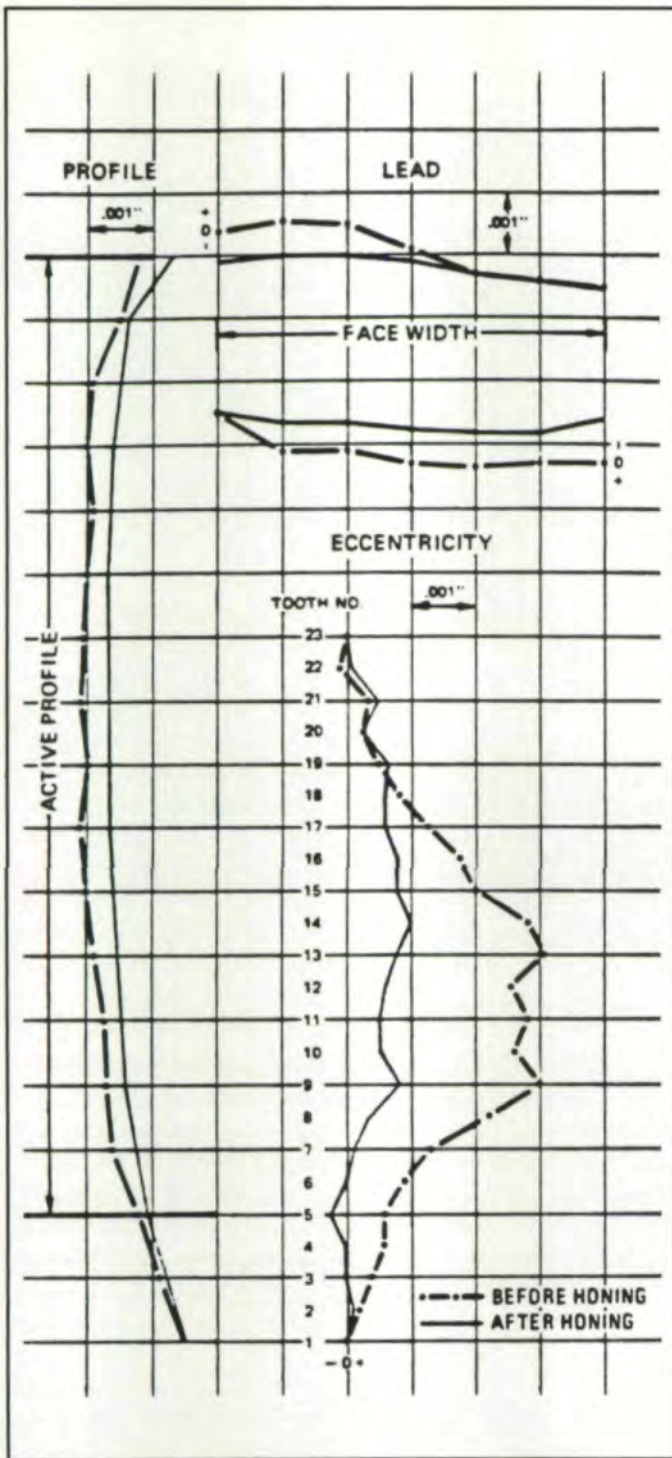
Improvement in tooth accuracy achieved by honing a shaved helical truck transmission gear.
